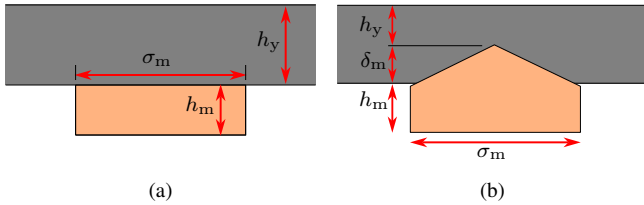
Partial rotor cross-sectional sketches illustrating the relevant dimensions for the design optimization: (a) arc-shaped magnet; (b) crown-shaped magnet.
